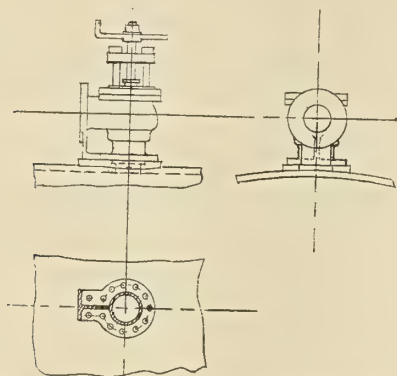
BOILER-STOP VALVE FOR MAIN STEM.
